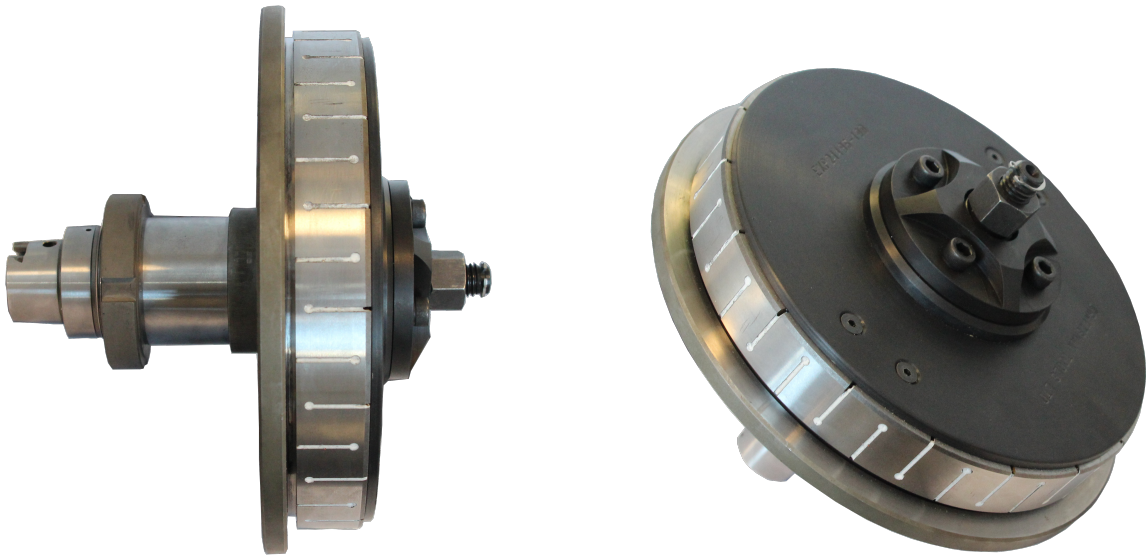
Expandable mandrel for clamping the rotating samples
